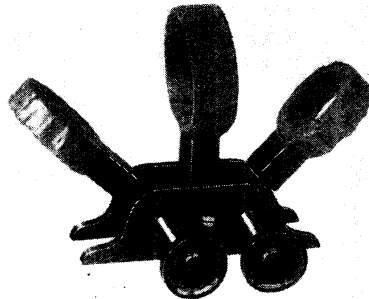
When the components are assembled and the coils mounted the appearance should be as in this photograph
